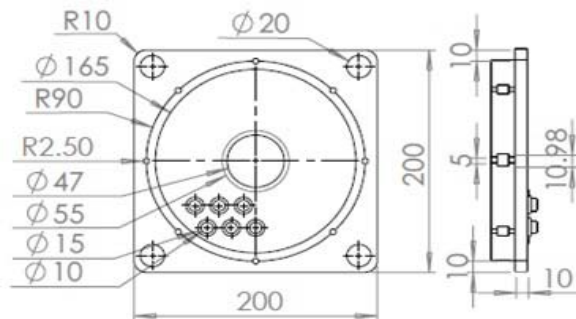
Design housing of 12S-14P OR-HEFSM in mm unit.
